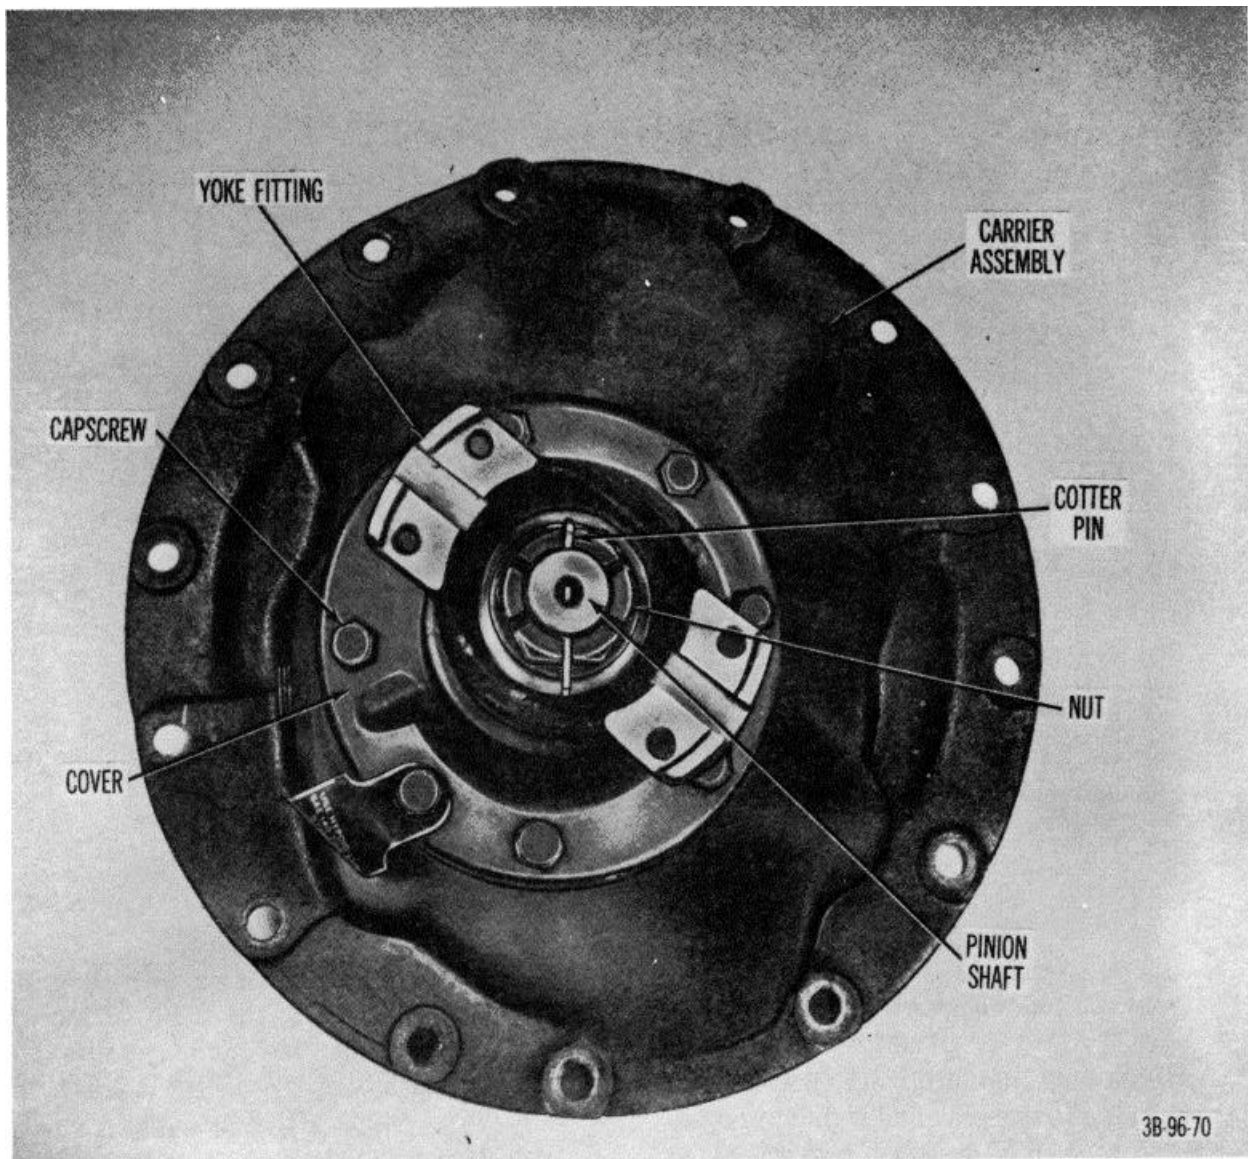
Carrier assembly showing yoke fitting and pinion shaft.
